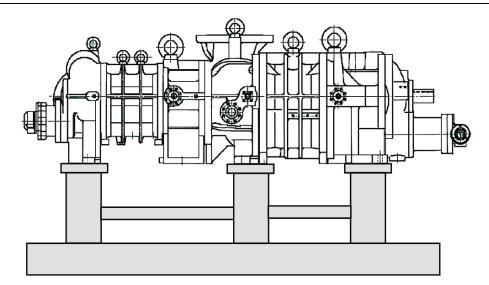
Special stand for removing the bolts of the bottom flange part of the compressor (The leg parts are movable.)
